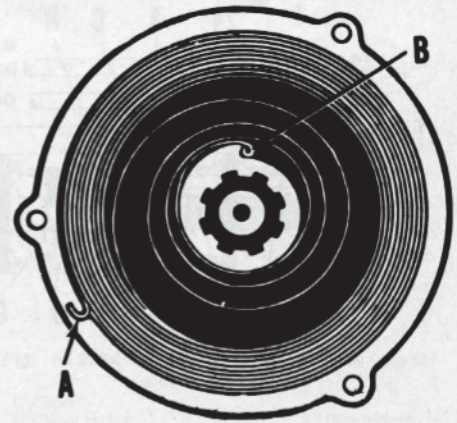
View of rewind spring installation in starter cover. Hook outer loop (A) of spring in notch as shown. Inner loop (B) of spring must be curved inward to engage notch of spring lock.
